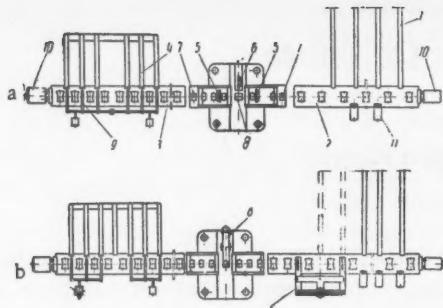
The layout of the auxiliary mechanism of the press: a) before the modernization; b) after the modernization; 1) charging table with batcher; 2) feeding roller tables; 3) delivery roller tables; 4) pockets; 5) left and right manipulators; 6) middle manipulators; 7) lifting rollers; 8) central lifting mechanism; 9) pushers; 10) stop; 11) shock absorbers.
